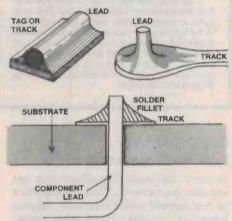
A good joint will be covered by a small fillet of solder which meets the parts of the joint at a tangent. The solder should be smooth and bright.
